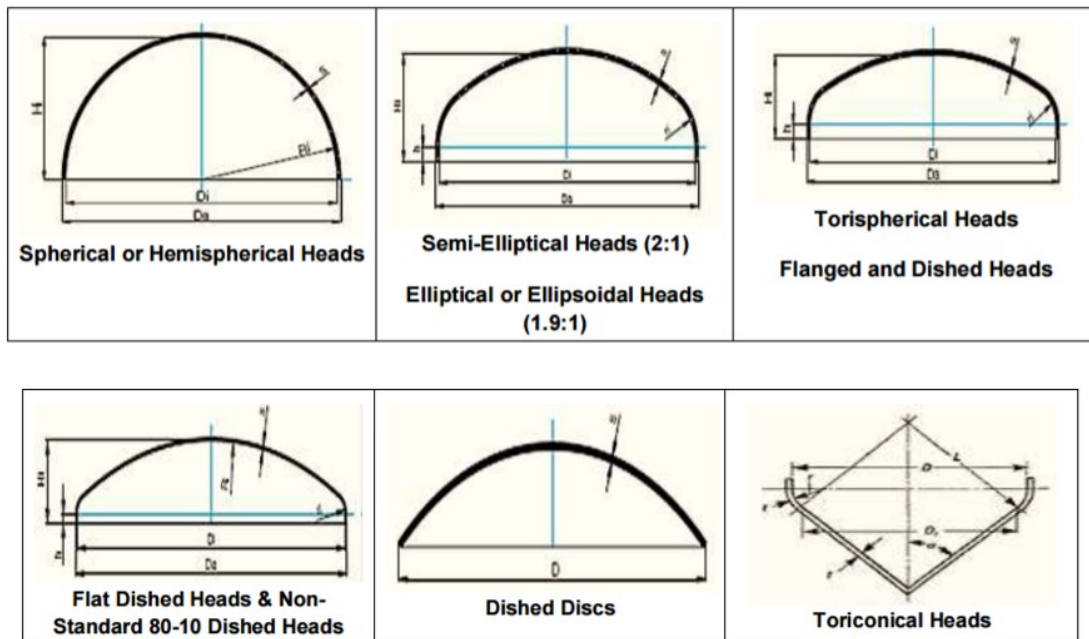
Standard or out-of-the-shelf available dish heads for integration into the housing mould
